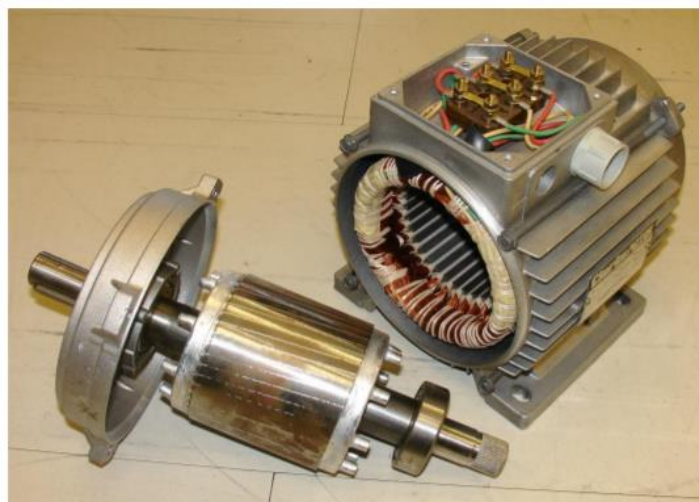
Induction machine components showing: motor cut-out; copper rotor
